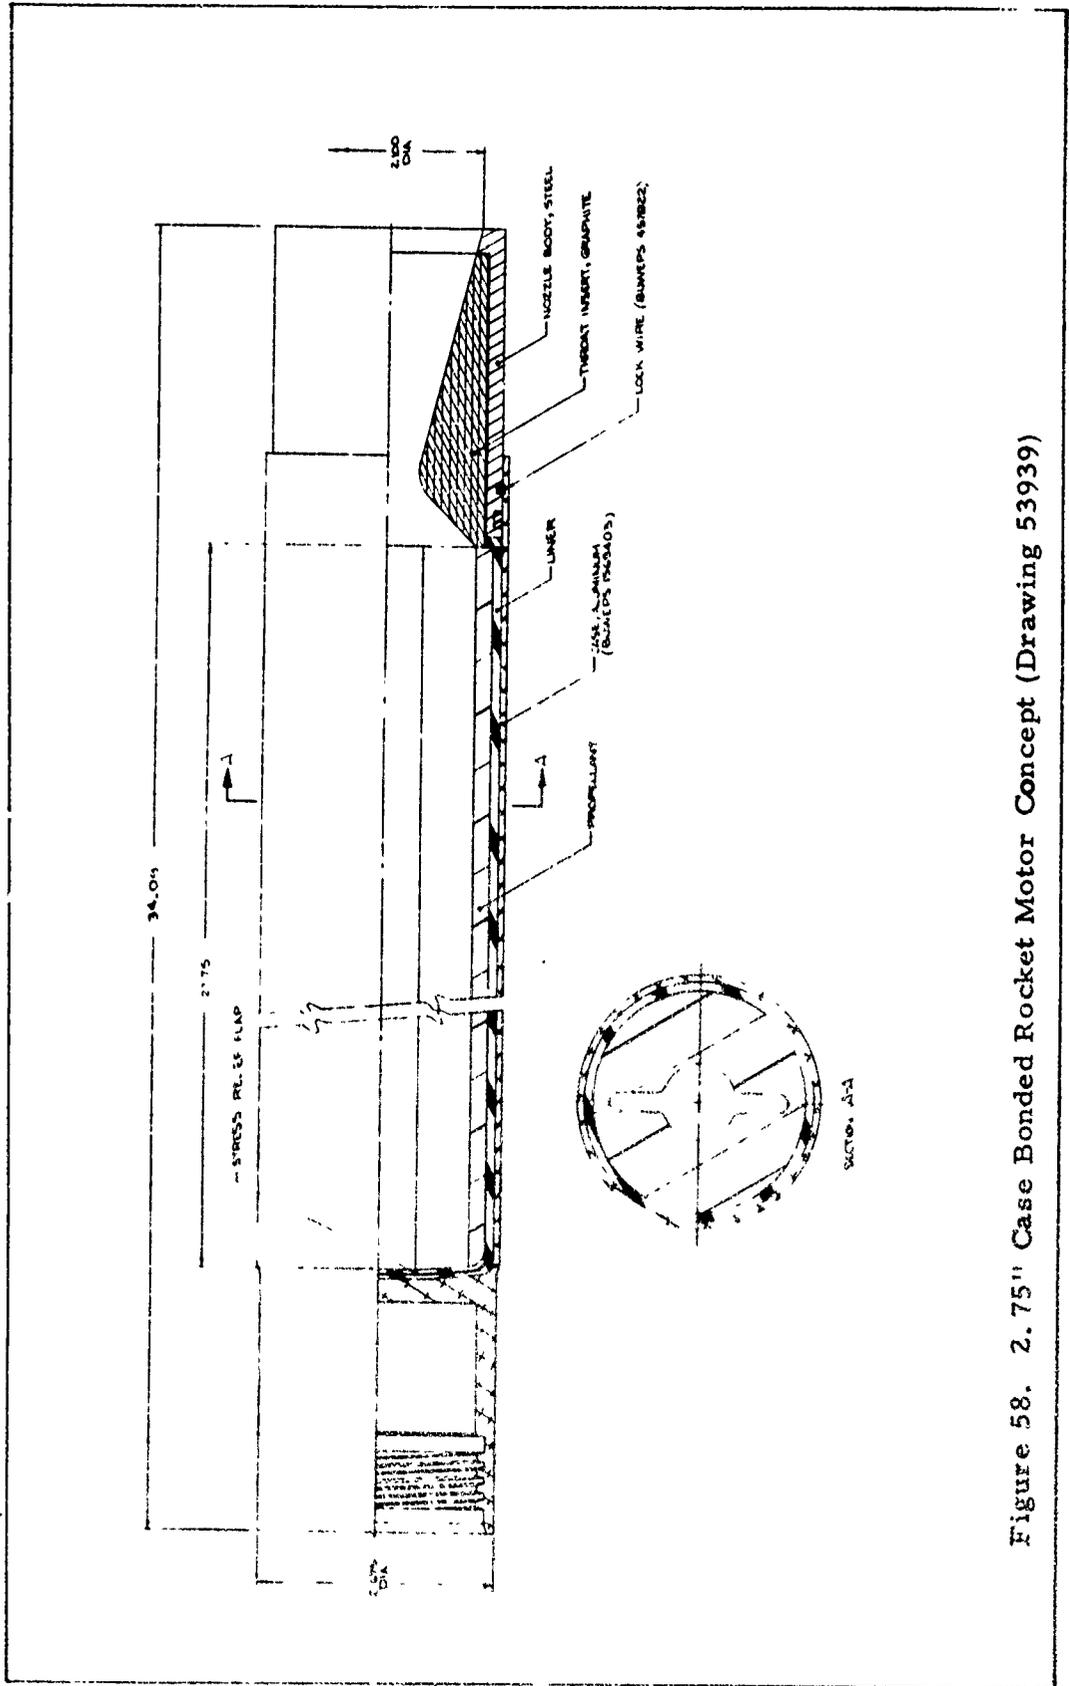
2.75" Case Bonded Rocket Motor Concept (Drawing 53939)
